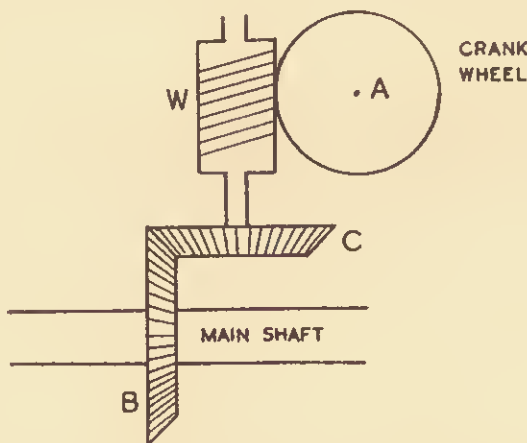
Arrangement of gear wheels in L  g   Machine.
